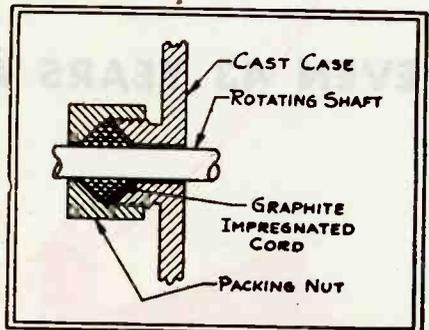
Shaft hole can also be sealed with impregnated cord and a packing nut
